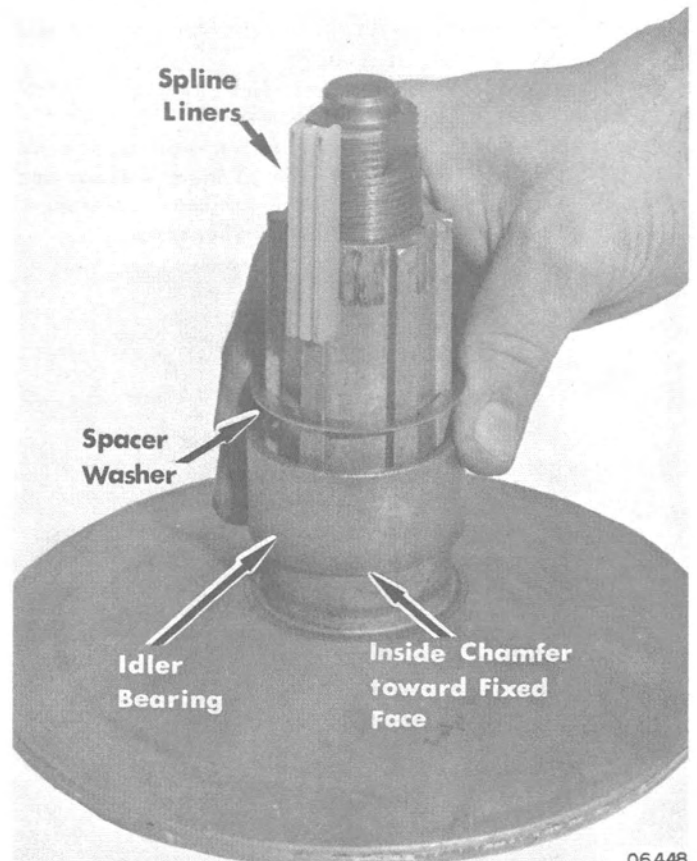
Removing Spline Liners, Spacer Washer and Idler Bushing
